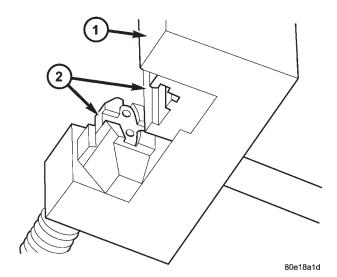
INSTALLING RIVETING INSERTS INTO RIVETING TOOL
